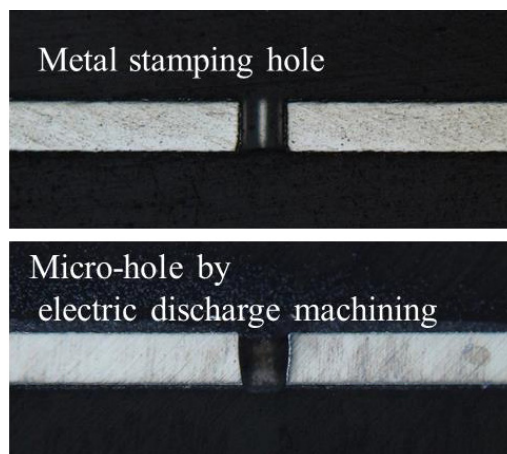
Cross sectional sample of micro-hole. It can be confirmed that the hole shape is different depending on the processing method of metal stamping and electric discharge machining.
